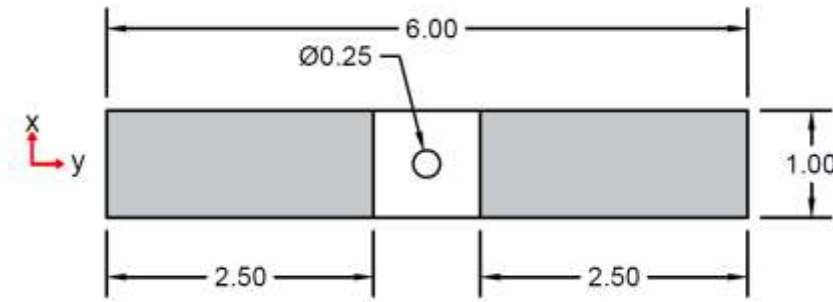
Typical specimen geometry and layout (all dimensions in inches)
